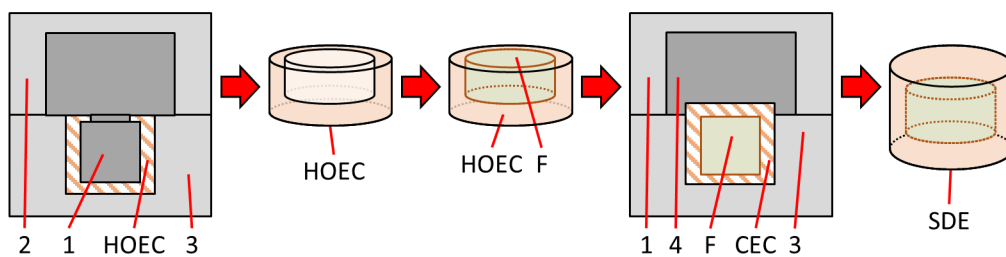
Process of silicone rubber molding. 1: interchangeable inner mold part, 2: positioning part holding the inner mold part, 3: outer mold part, 4: SDE enclosing part, HOEC: half open elastic cover, F: fluid fill, CEC: closed elastic cover and SDE: enclosed spring-damper-element.
